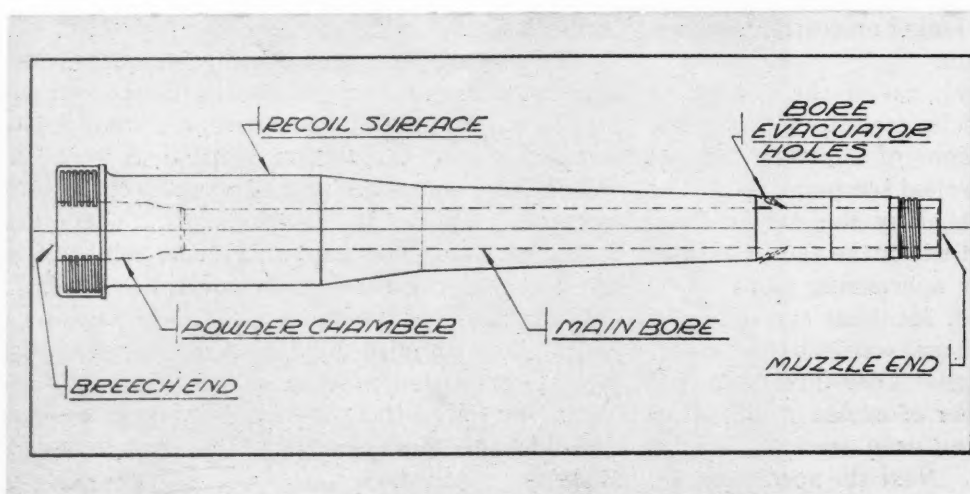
Diagram of gun barrel, indicating various surfaces machined with equipment referred to in this article
